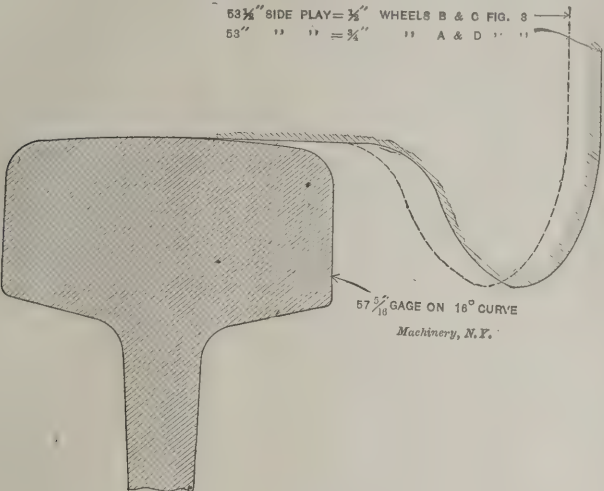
Showing Side Play of Wheel Flange and Rail Head.
